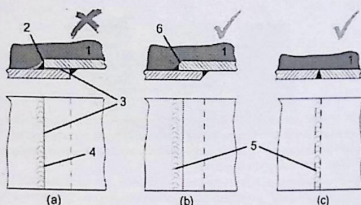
(a, b) In the product contact area (1), product debris may become trapped at step (2) and in the crevices and metal-to-metal contact areas between the seams (3), if overlapped sheets of metal are intermittently welded (4) instead of continuously welded. (b) Overlapped sheets of metal must have continuous welds (5) and sloped edges (6) for easy cleaning. (c) However, it is still better to avoid overlapping sheets of metal, and to give preference to smooth continuously welded sheets (Lelieveld et al., 2003; Hauser et al., 2004b).
